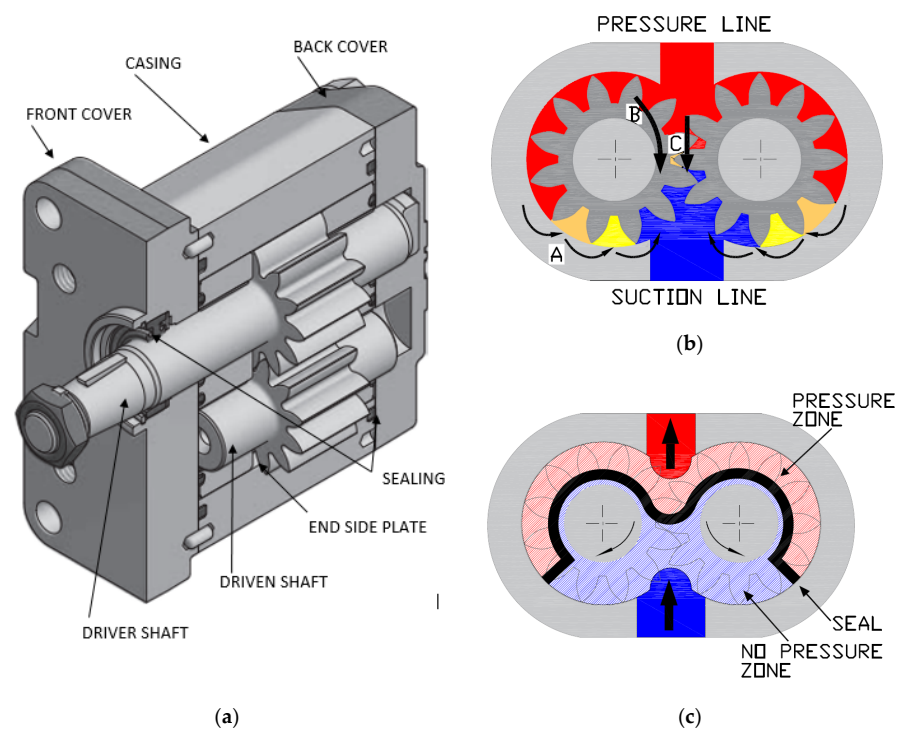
Inside of a gear pump: (a) parts of a gear pump (source: ROQUET Group S.A.); (b) leakage paths; and (c) rear of the side plate.
